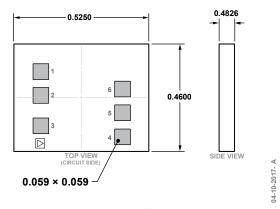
6-Pad Bare Die [CHIP] (C-6-11) Dimensions shown in millimeters
